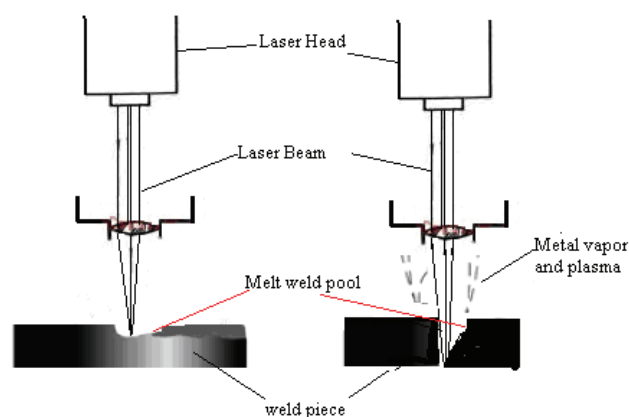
Conductivity based Laser Welding; 3b: Penetration based Laser Welding
